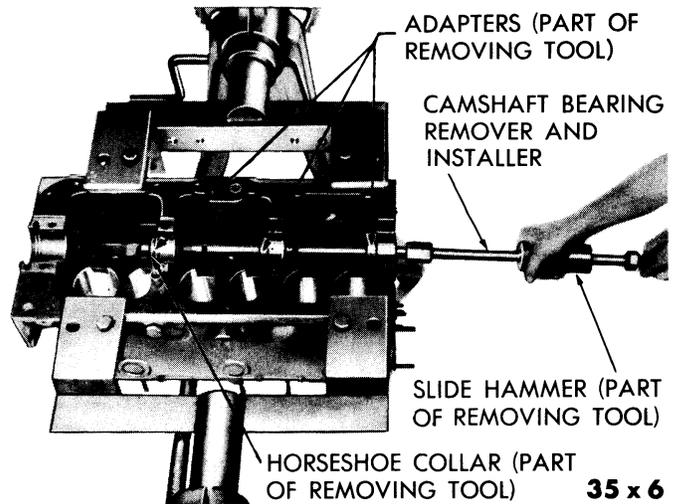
Removing Camshaft Bearings—6 Cylinder Engine
